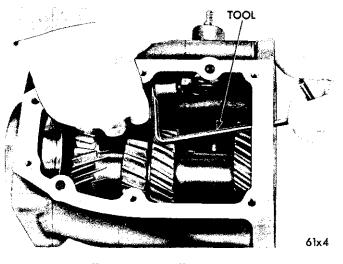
Installing Detent Balls (Using Tool C-3765)
